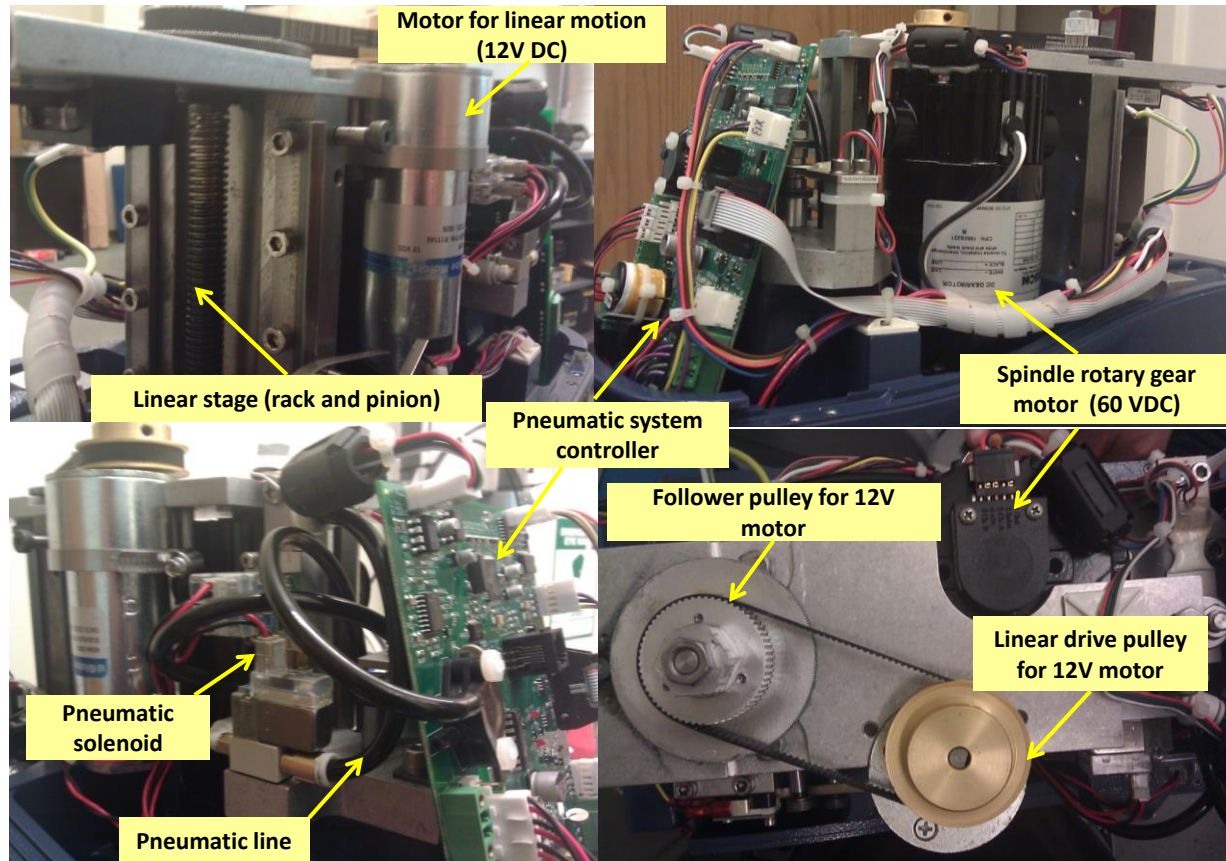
Photographs showing the main components of the polishing machine: DC motors (12 VDC motor for the linear stage, and 60 V PMDC gear motor for spindle rotation), drive arrangement, pneumatic system for controlling downforce, and microcontroller.
